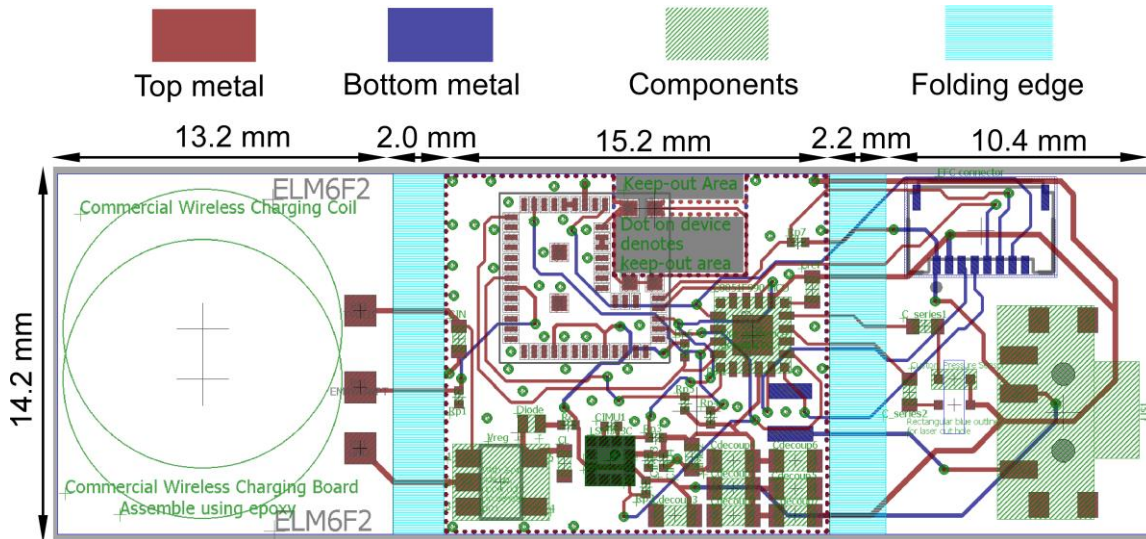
Layout of the foldable polyimide PCB (L×W: 43.0 mm ×14.2 mm).
